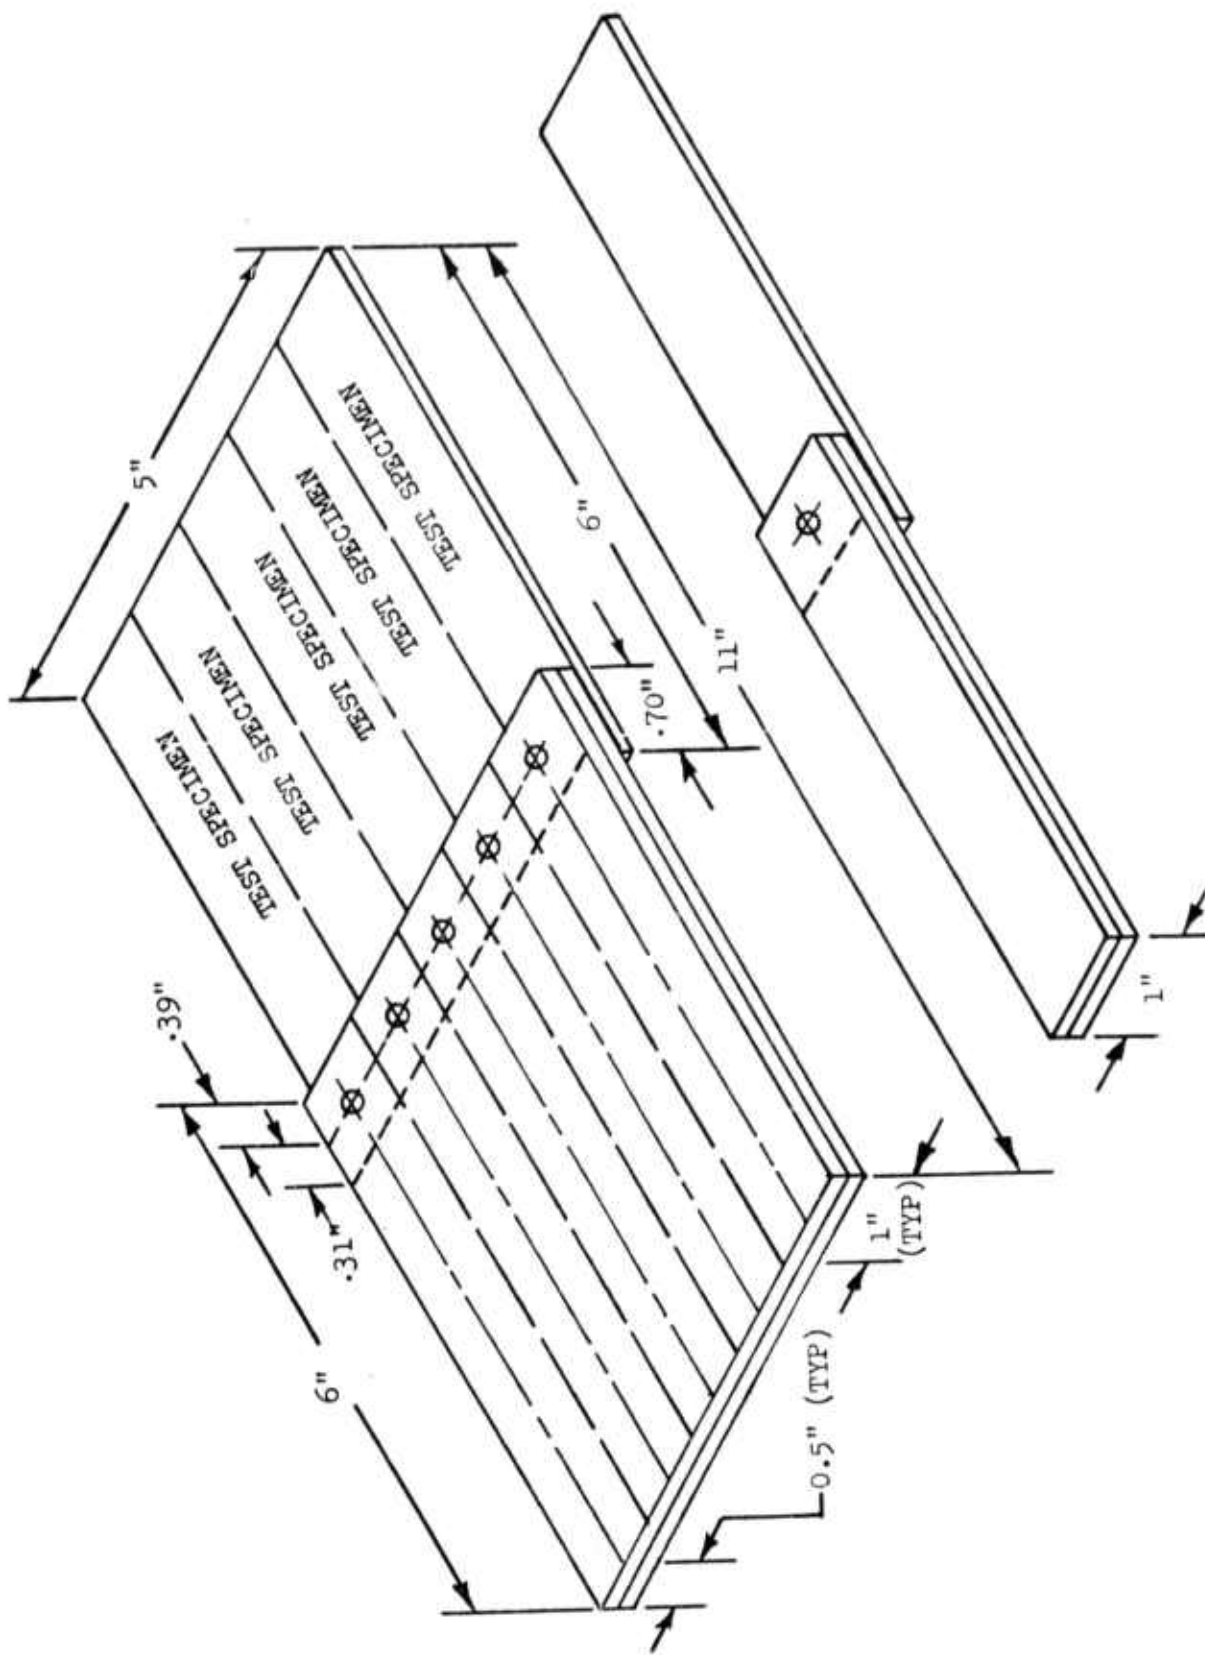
MULTI-PLY LAP SHEAR TEST PANEL AND TEST SPECIMEN
